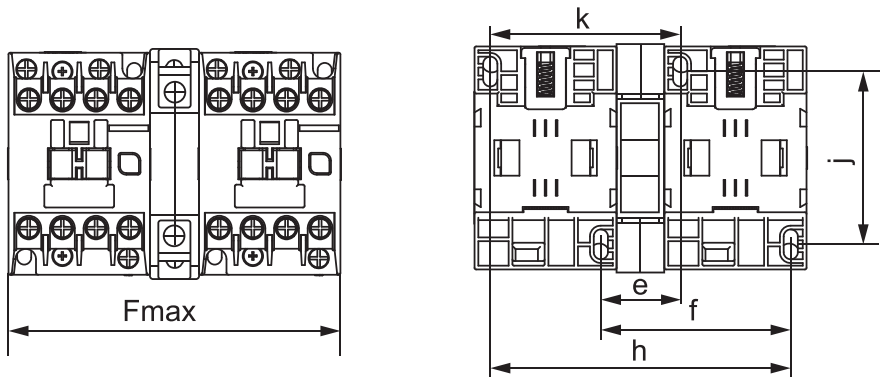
TGC1s-09N~38N outline and installation dimensions drawings
